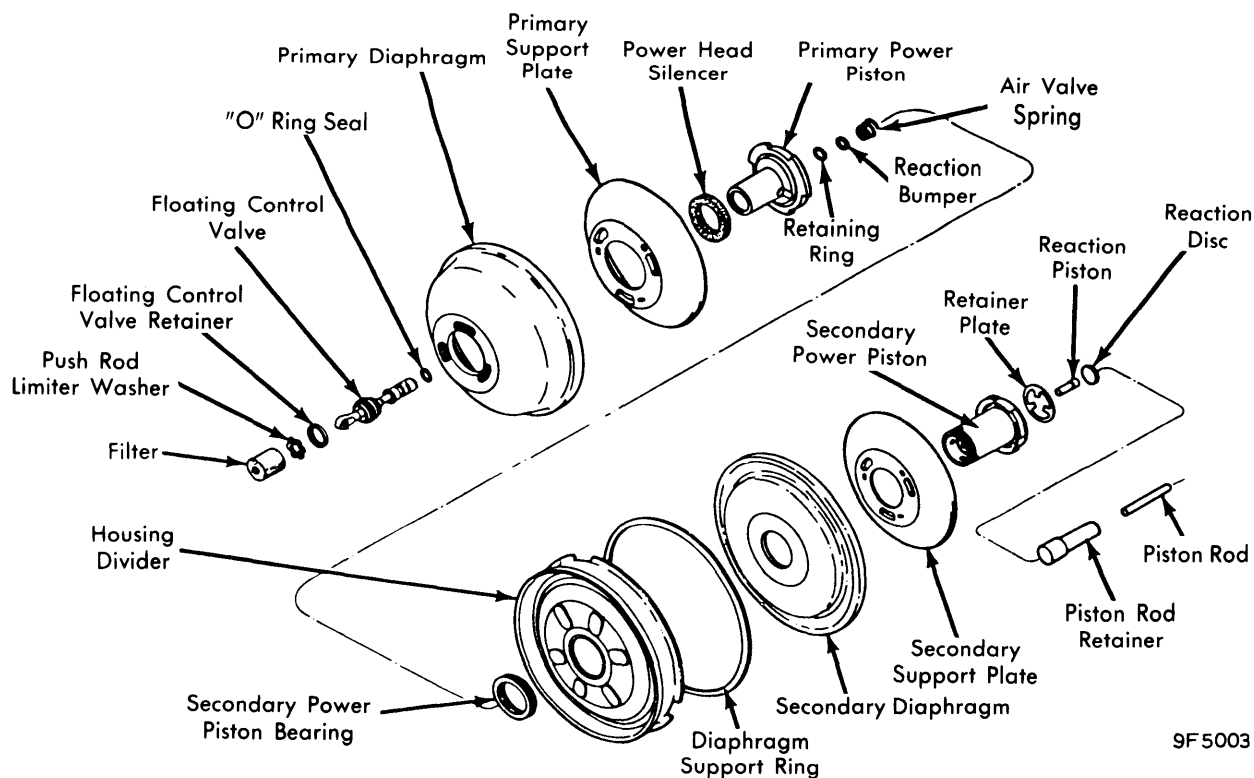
Exploded View of Delco-Moraine Tandem Power Piston
